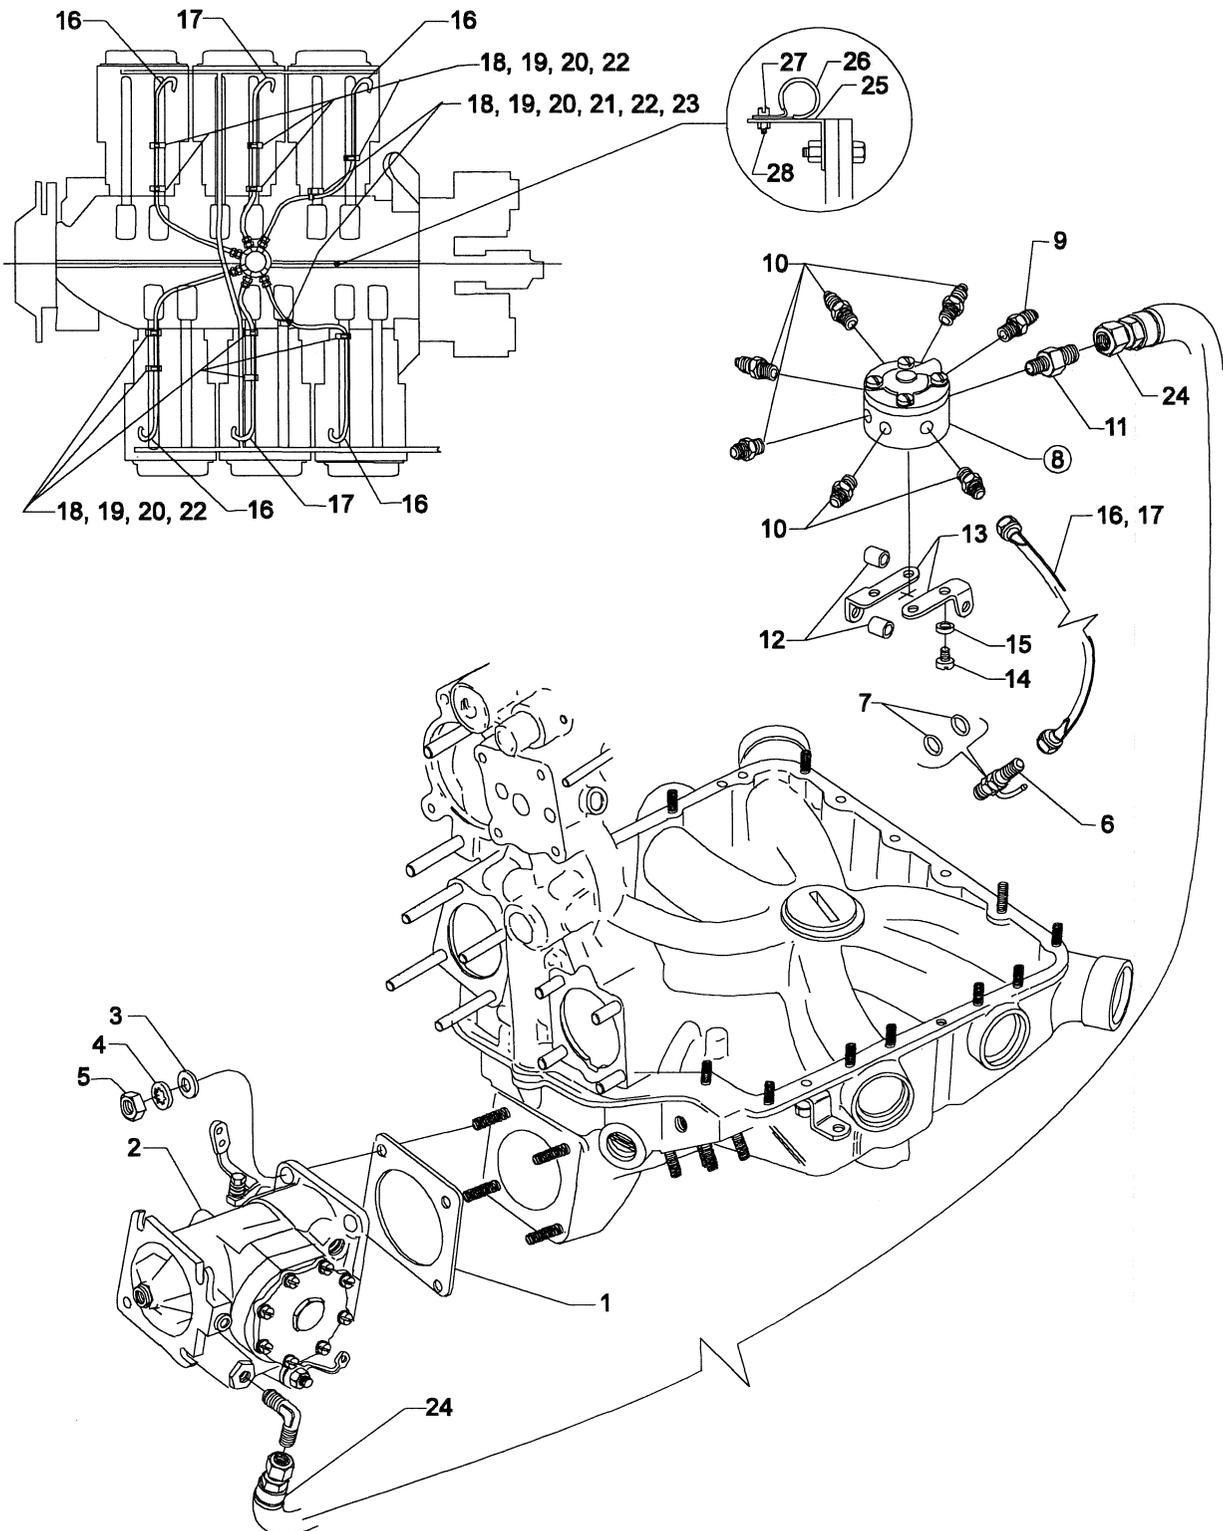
FUEL INJECTOR, FUEL MANIFOLD AND INJECTION NOZZLES
